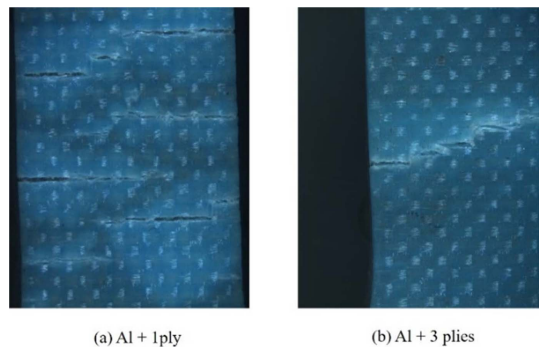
Fractography of GFRP-coated Al specimens at the tensile test
